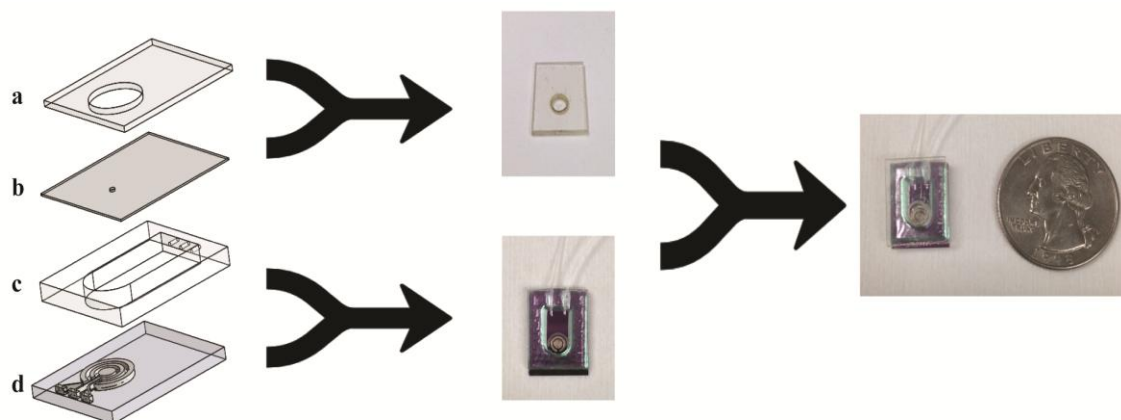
Planar patch clamp assembly layout. Assembled device is 11 mm x 14 mm x 22 mm. (a) 500 μm thick fused silica with 4 mm hole “cell well”; (b) 150 μm thick fused silica with $\leq 5 \mu\text{m}$ patch-pore; (c) PDMS intracellular solution exchange chamber; (d) Calcium ISE
